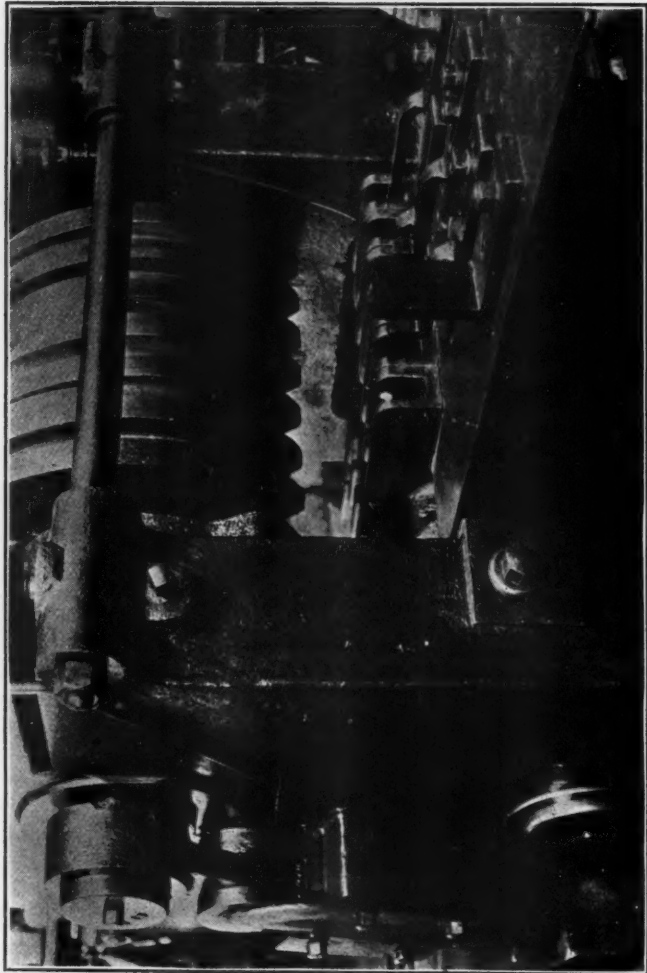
REAR VIEW OF AJAX BRAKE LEVER ROLLS. SHEAR FOR ROUNDING ENDS AT LEFT SIDE.
